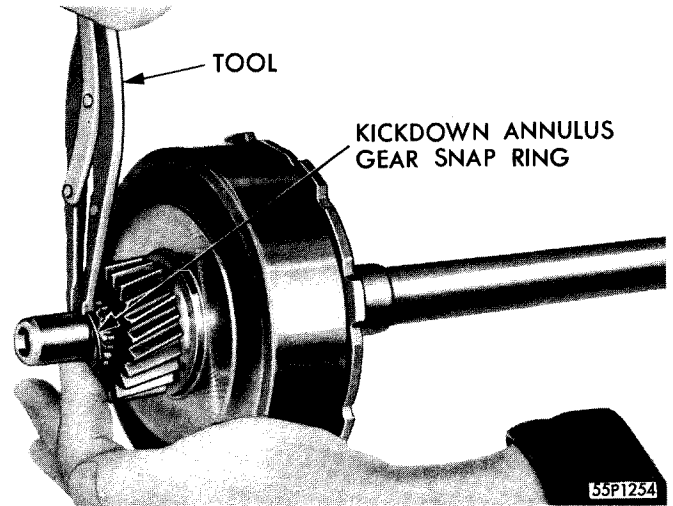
Removal or Installation of Kickdown Annulus Gear Snap Ring
